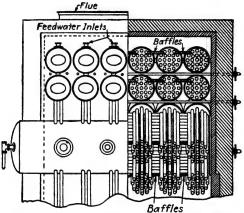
Plan of rear portion of Bigelow-Hornsby boiler, showing drum arrangement and method of baffling.
